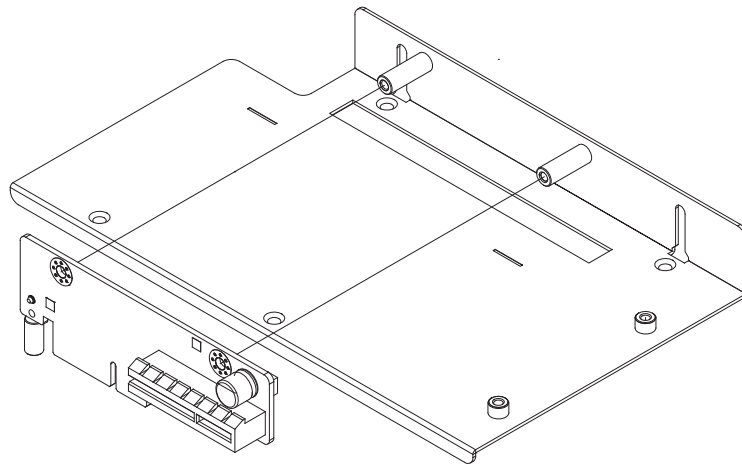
IR Module Assembly-1/IR 模块安装 -1/IR 模組安裝 -1
